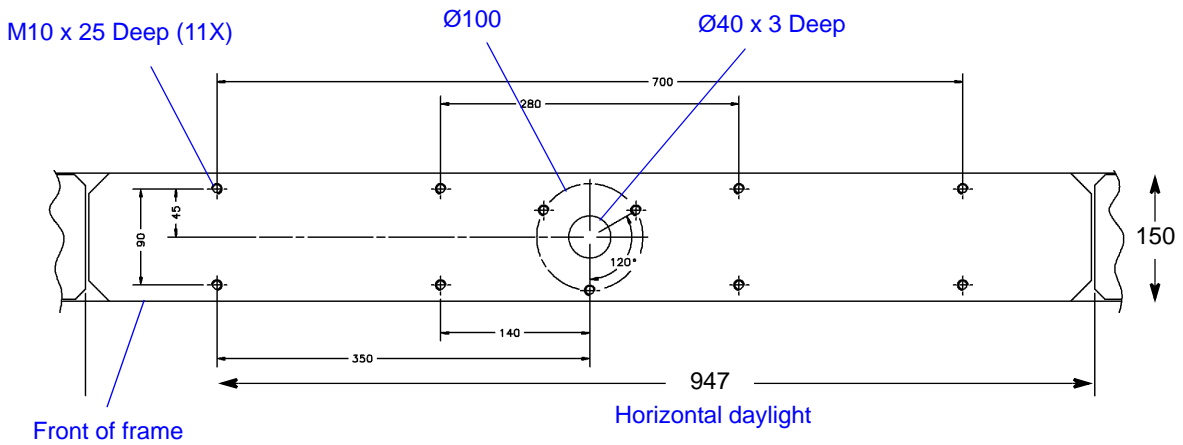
Series 5565, 5566, 5567 Extra Wide Configuration - Base Beam Mounting Dimensions
